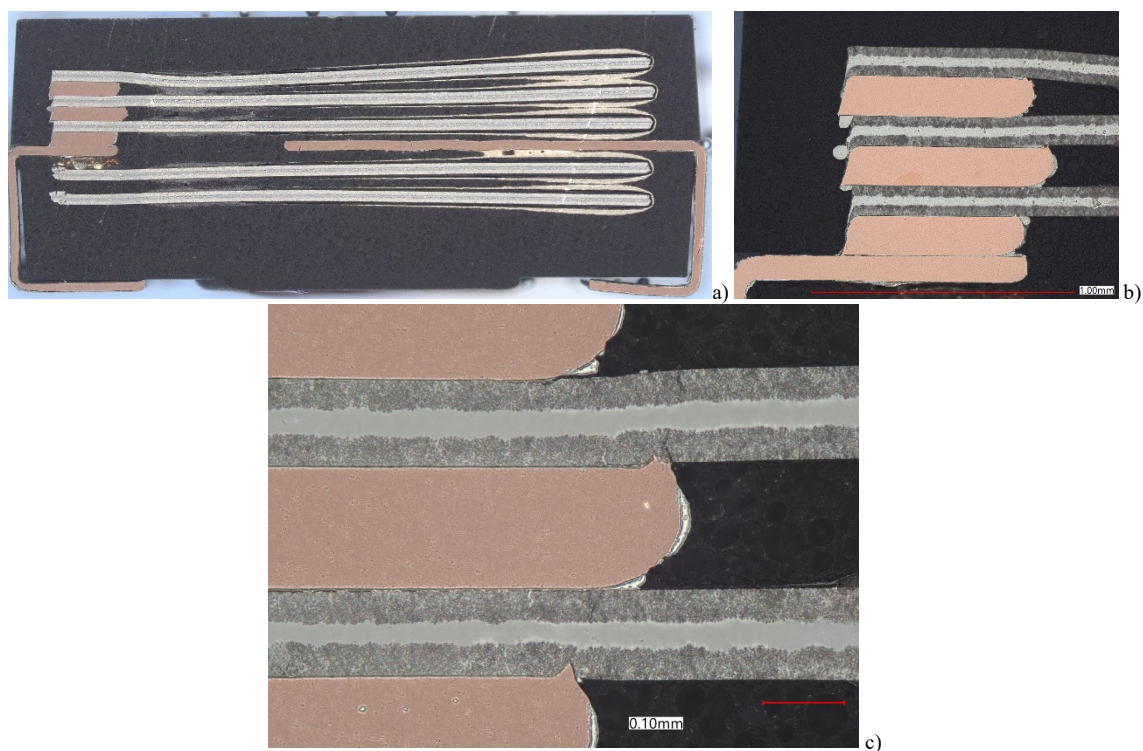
Cross-sectioning overall (a) and close-up of the anode area (b, c) views of the part showing copper alloy anode spacers plated with tin and cracking at the burrs in the spacers (c).
